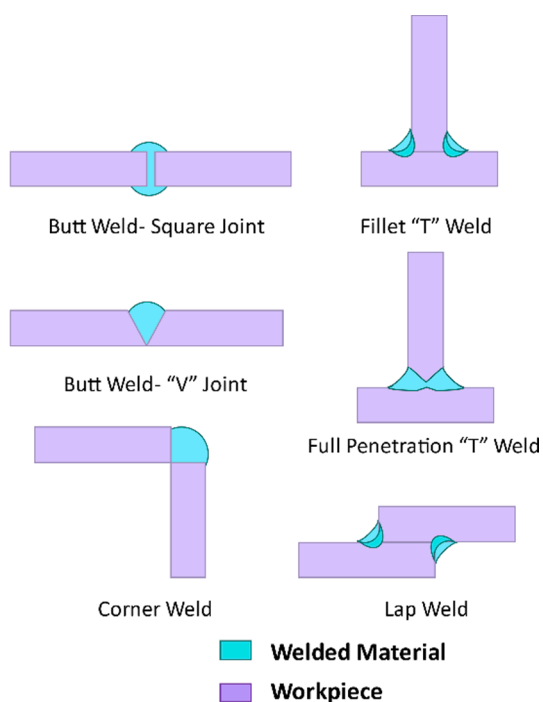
Typical types of welded joint configurations regardless the substrate material (adapted from [118,119]).
